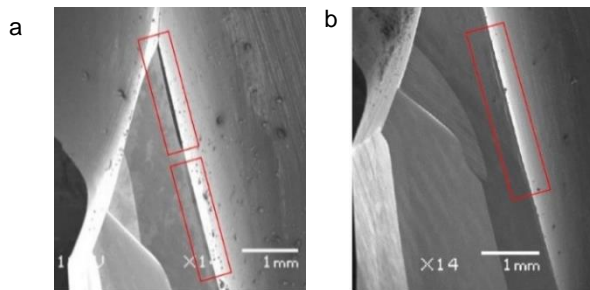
SEM images at X14 magnification (a) Chipping and abrasive tool wear in cryogenic condition; (b) Abrasive wear in dry machining condition
